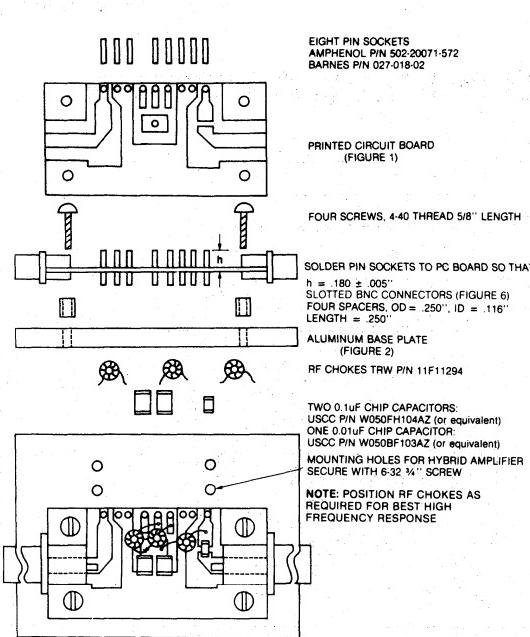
CA2820 Test Fixture Assembly (Case 714F-01)
